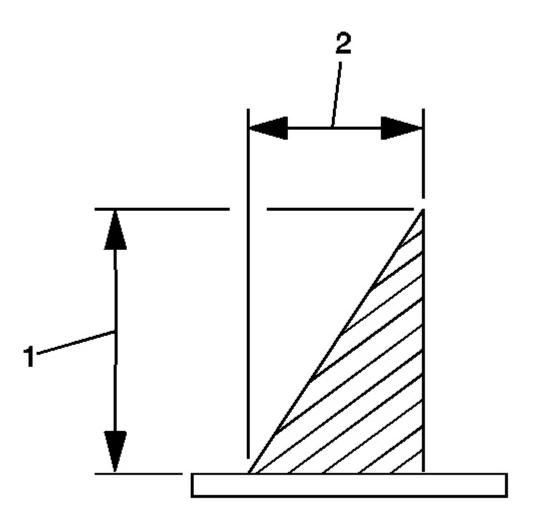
Applicator Nozzle Hole Measurements Courtesy of GENERAL MOTORS CORP.
